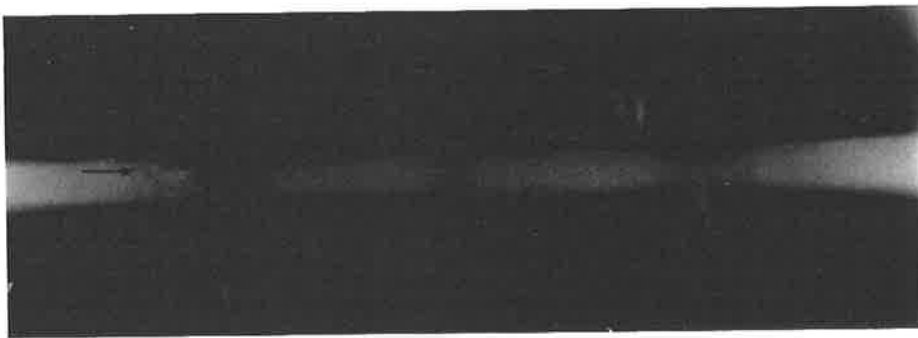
Photo of a radiograph of a weld containing a worm hole pore (indicated by an arrow on the photo).
